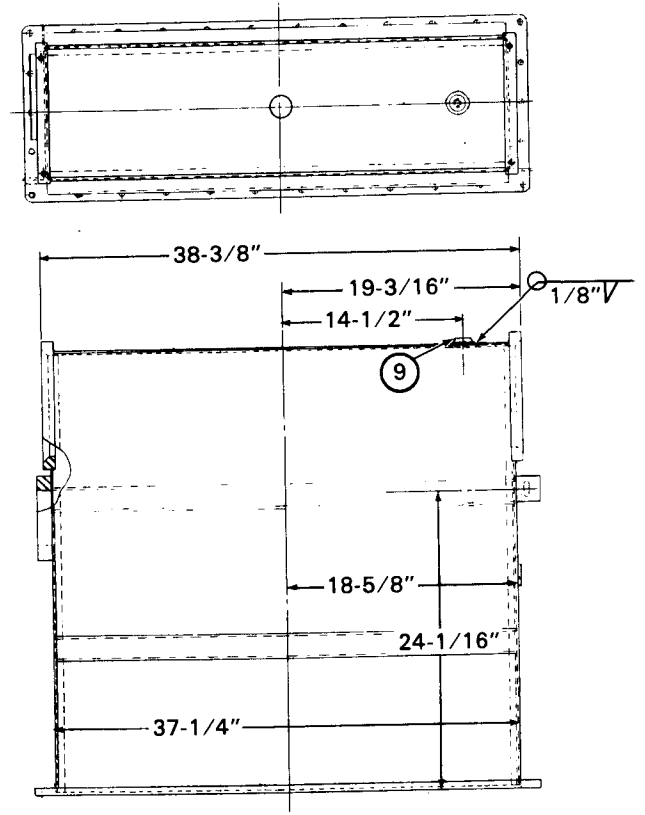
"S" Unit Oil Cooler Tank Flange Application
